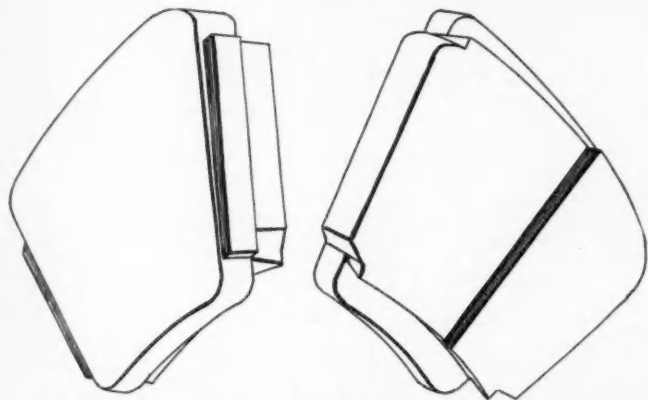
THRUST PAD OF MICHELL MARINE THRUST BEARING
